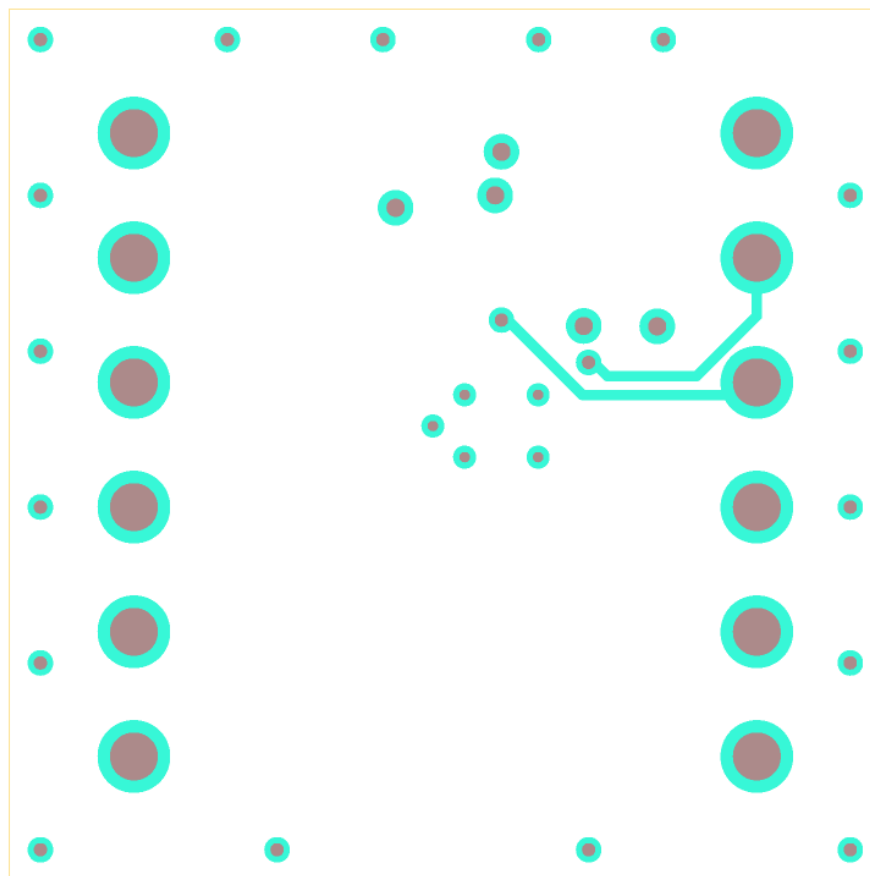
SMP-TPS61200-MVK Board Solder Mask – Top Side
